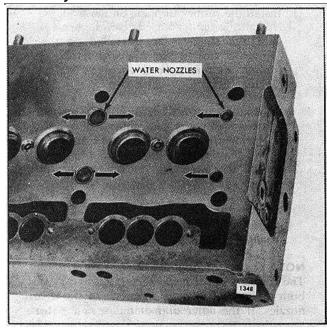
Correct Installation of Water Nozzles in Two-Valve Cylinder Head
